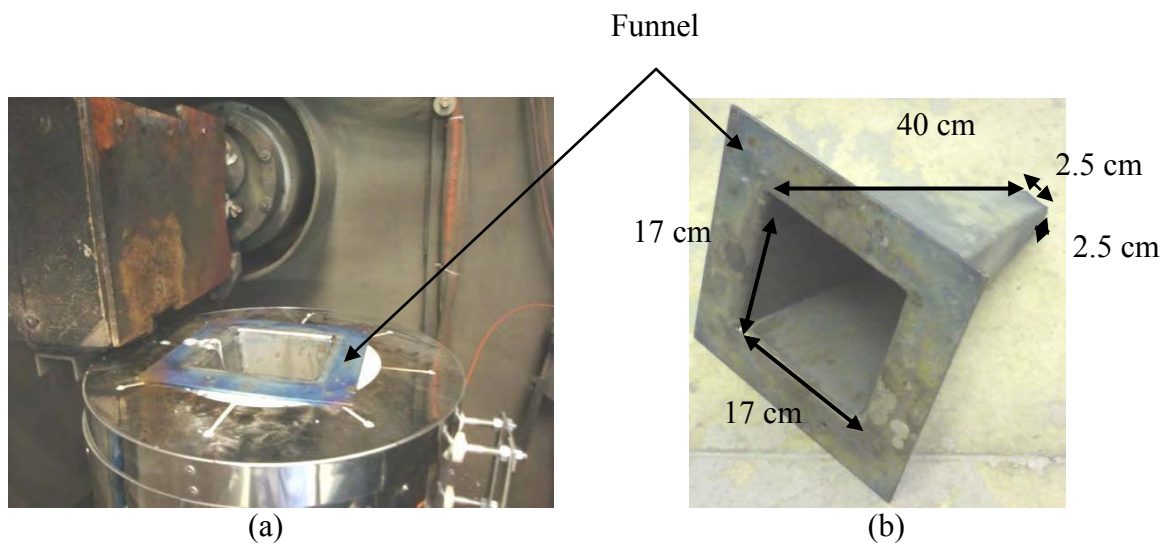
10. (a) Close-up of the funnel inserted in the electric resistance furnace and (b) dimensions of funnel.
